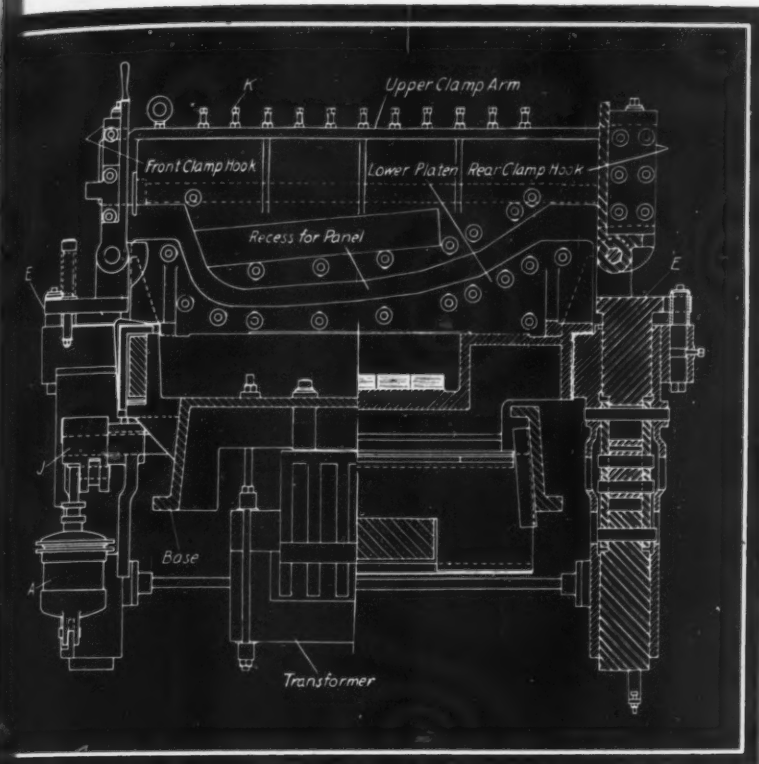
Welding dies follow contour of auto body panels, clamped in recess, to charge them with high amperage current
